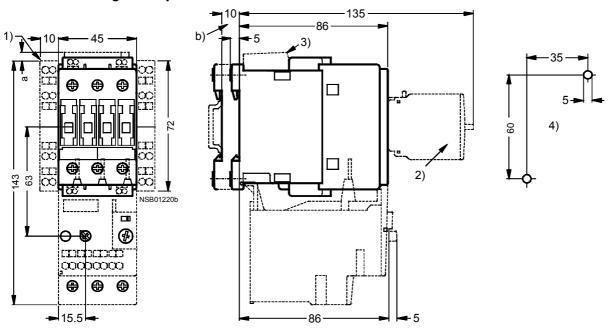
3RT10 2 contactors. 3RT10 2 coupling contactors with surge suppressor, auxiliary contact block and installed overload relay (Cage Clamp-connection)
